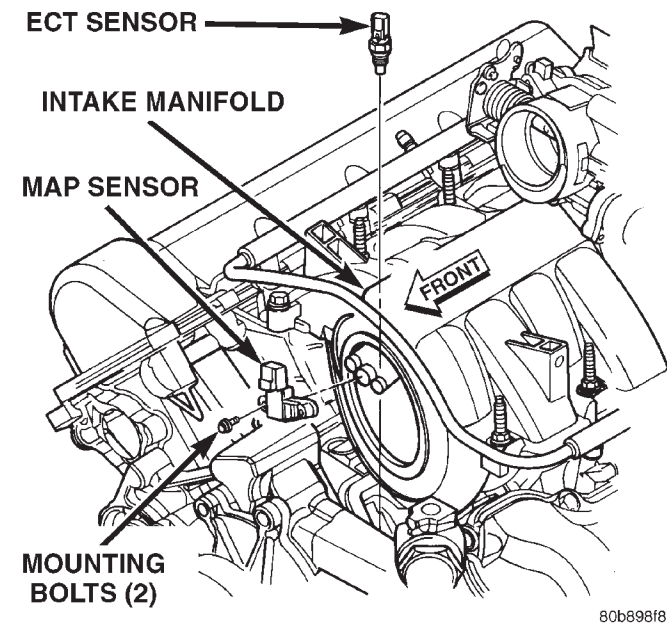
Engine Coolant Temperature Sensor—4.7L V-8 Engine
